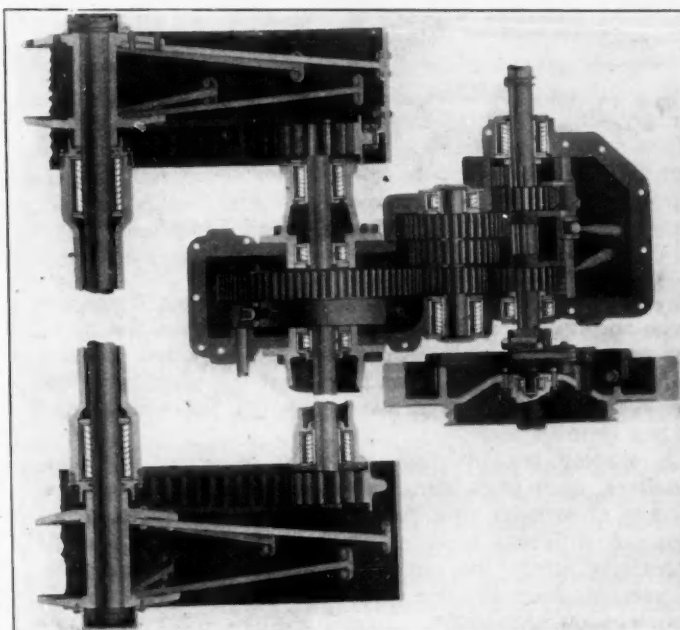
TRANSMISSION AND INTERNAL GEAR DRIVE OF THE WATERLOO BOY TRACTOR
